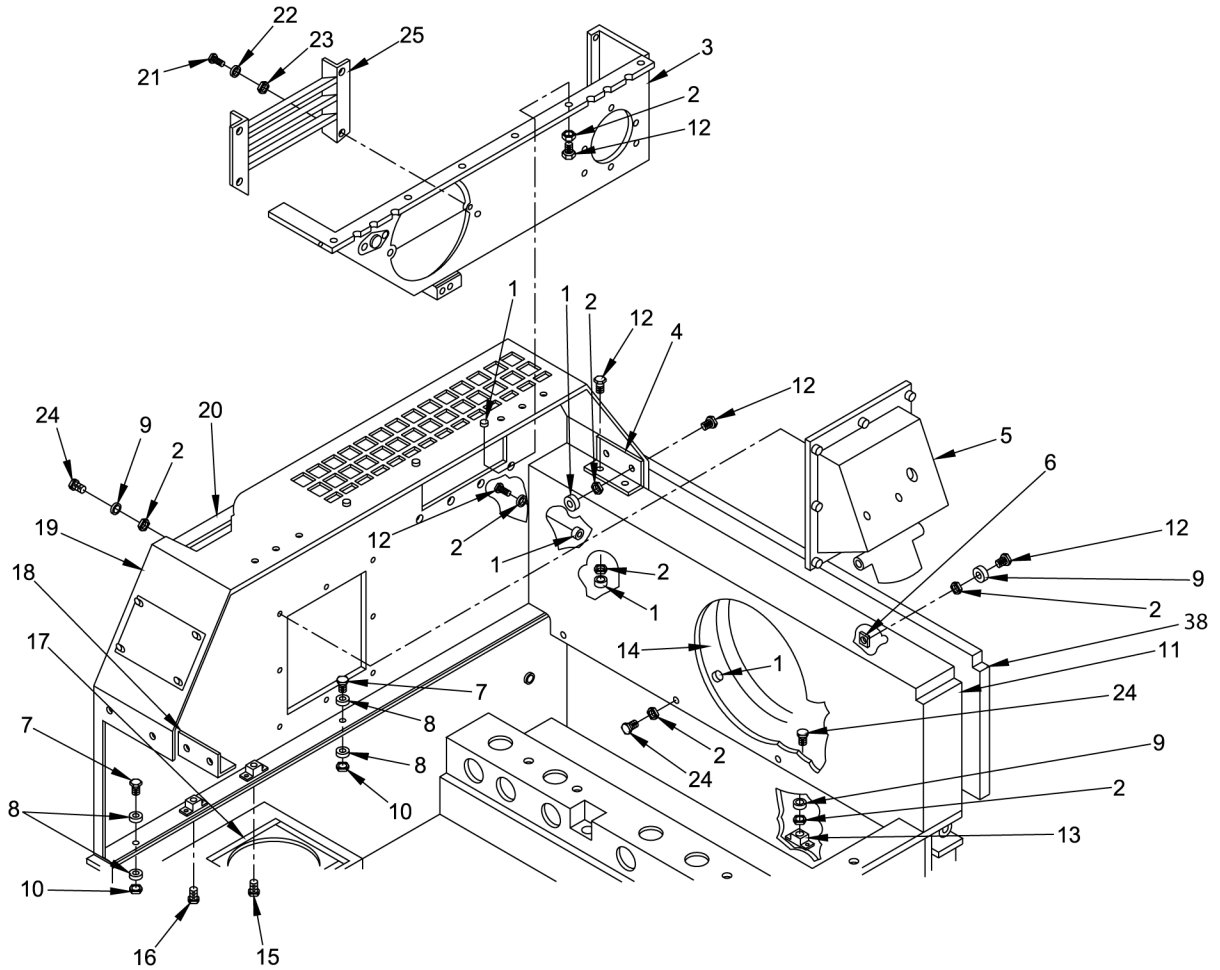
Frame and Housing Assembly/Frame and Housing Panels (Sheet 1 of 2).
